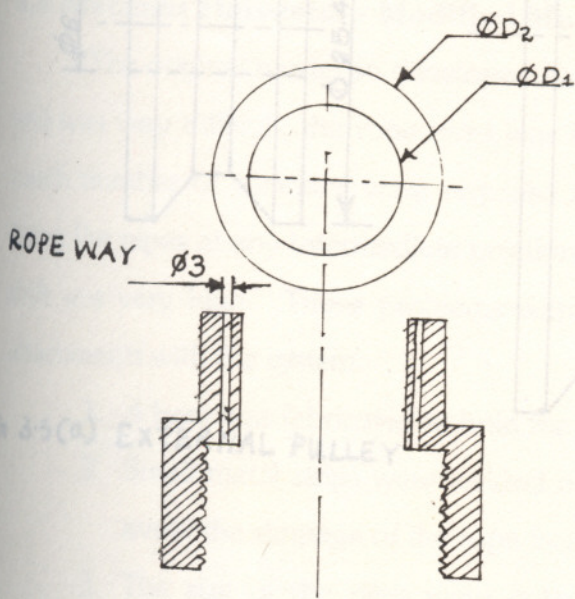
(b) SECTIONAL VIEW OF THE SOCKET
